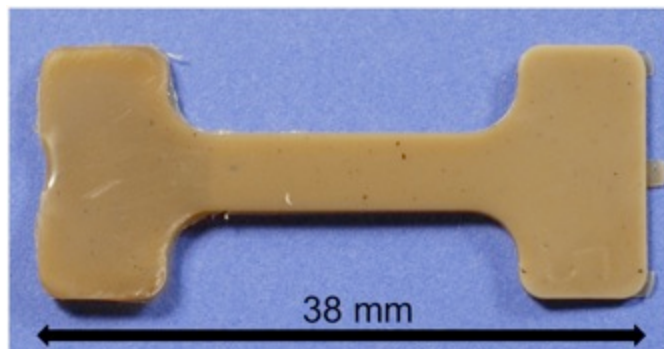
Injection molded tensile specimen of PEEK (Victrex 450G).
